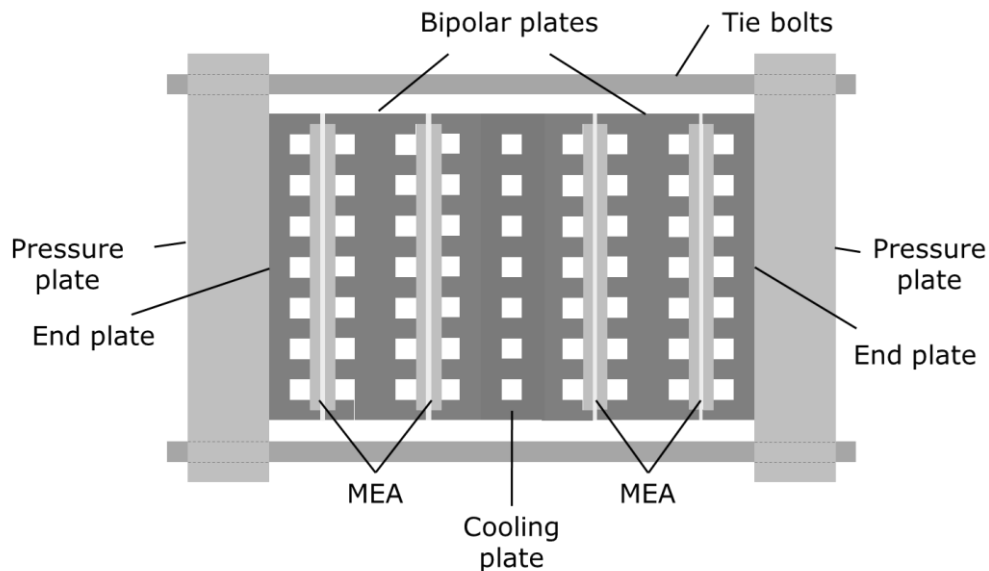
Schematic drawing of fuel cell stack in bipolar design with cooling plate in cross section
